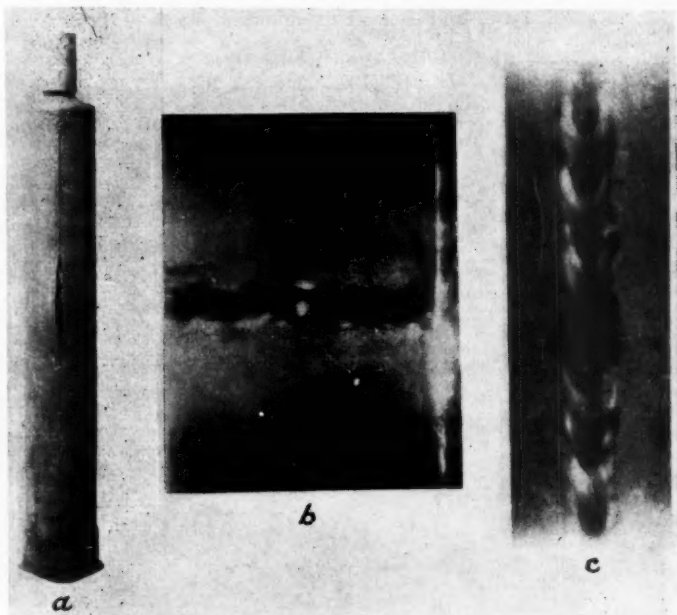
Radiographs of faulty welds in a gas-cylinder which burst in use.
